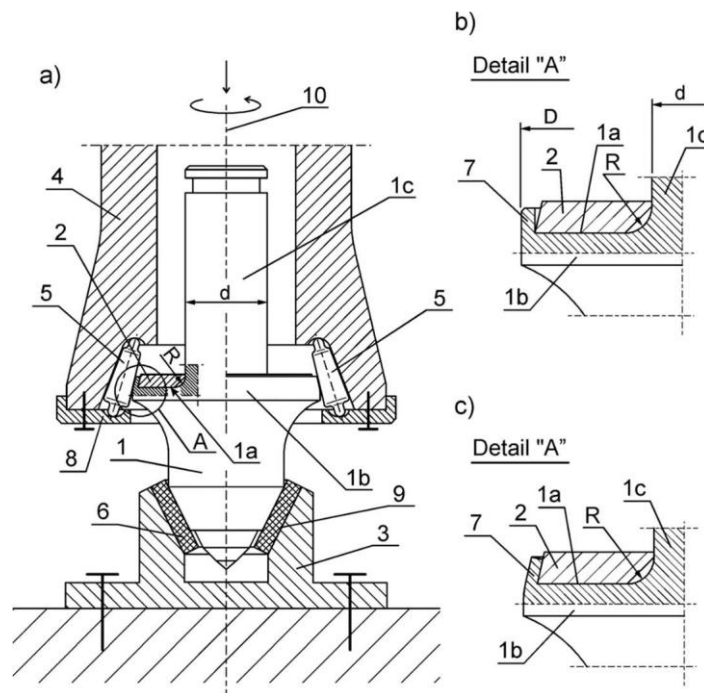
Device for mounting adapter rings in the shafts of mining machines conical picks: a) the device when connecting the adapter ring (2) in the pick (1) by rolling the shoulder material, b) detail "A" before the rolling operation, c) detail "A" after permanent rolling of the shoulder material (7) on the adapter ring (2) (description of the operation and indications of the device elements in the text)
